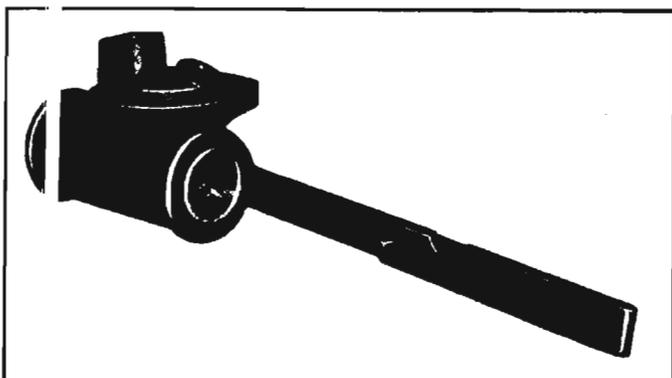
Checking Wheel Cylinder Piston Fit
